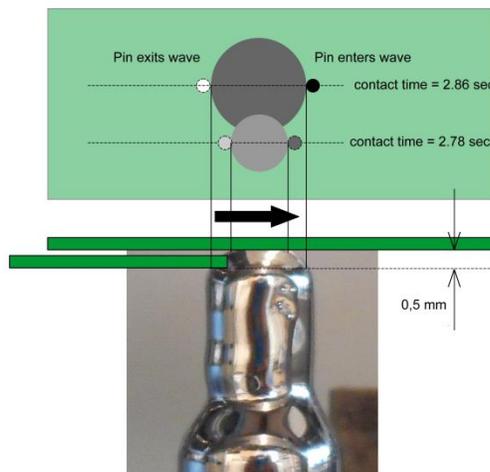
The impact the immersion depth – deeper in the solder longer contact.
